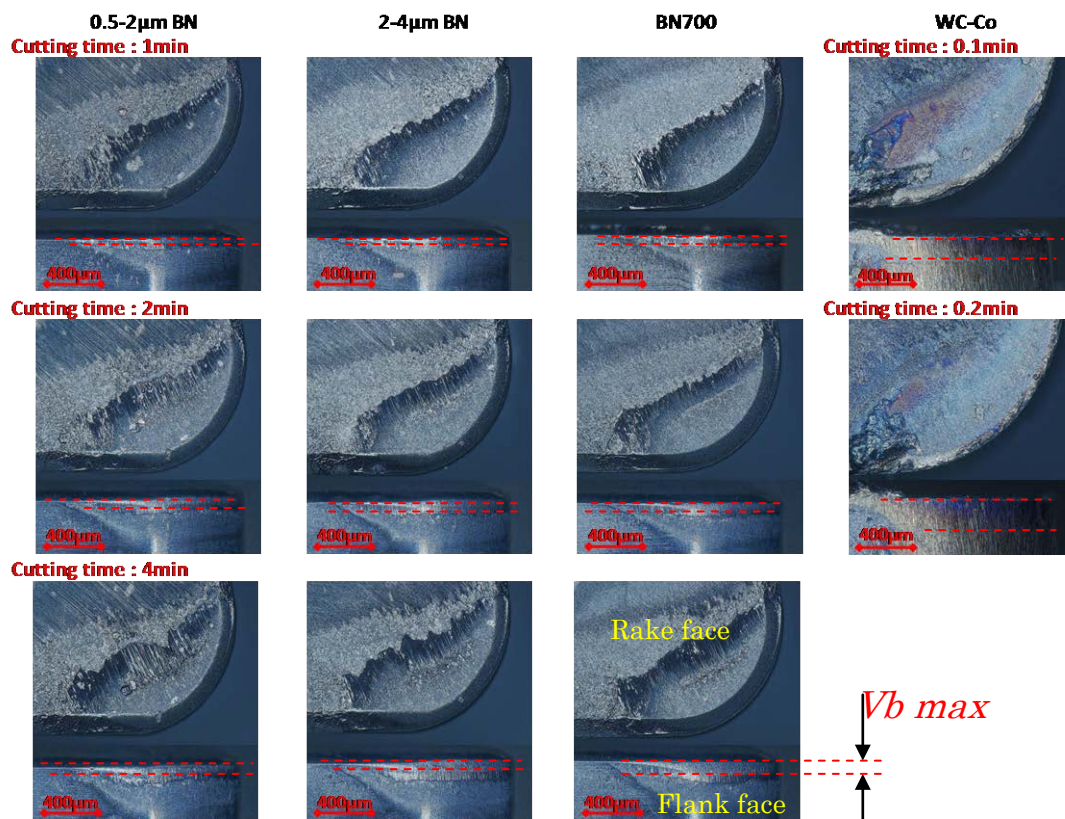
Tip-edge of the PCBN cutting tools after rough turning of FC300. The upper image is the rake face and the lower one is the flank face
